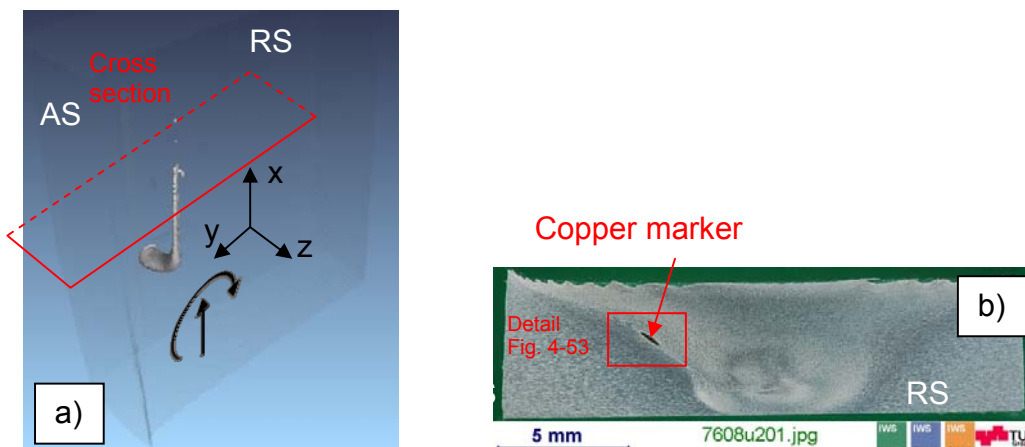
3D CT image of copper marker P002A after welding a) and macrograph of cross section showing marker P002A b)
